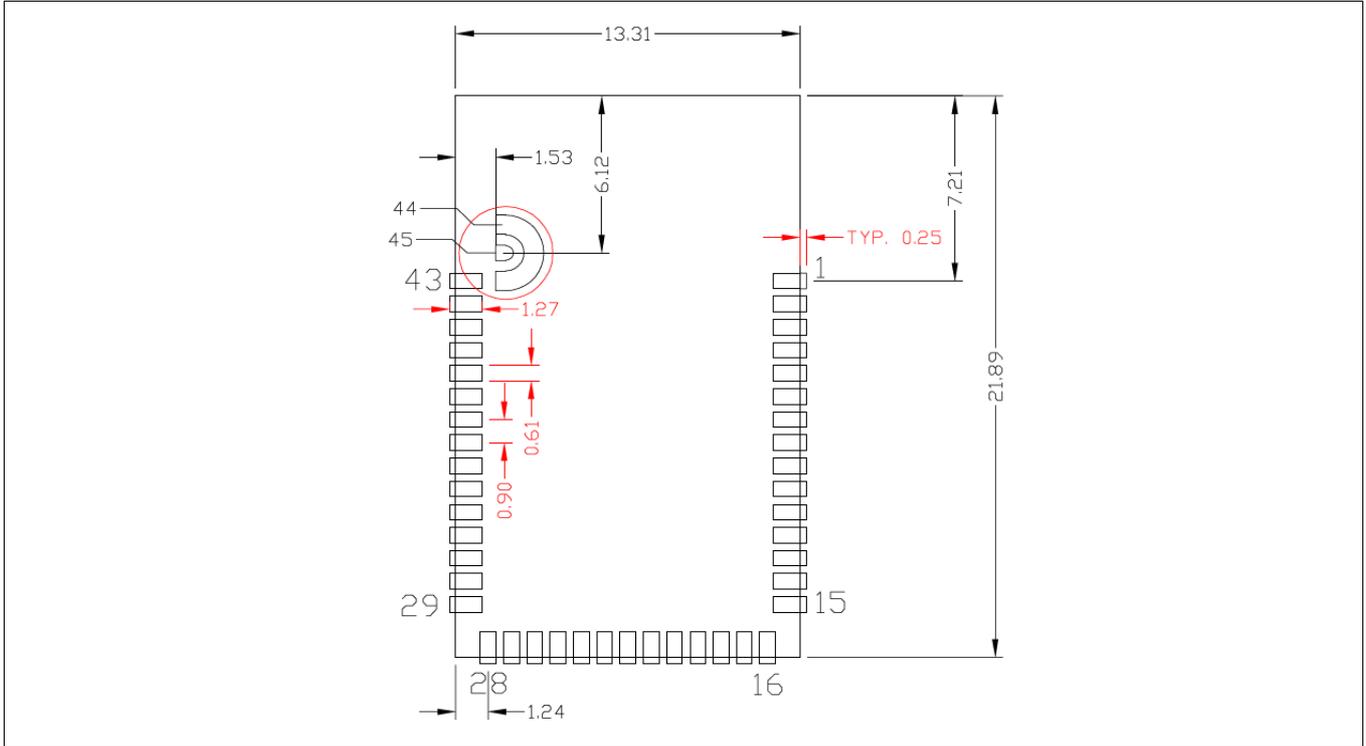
CYBLE-3x307x-02 host layout (dimensioned)
